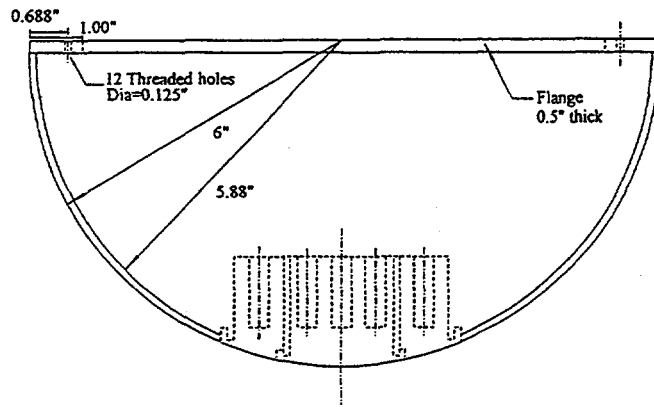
Side View of the Thick Aluminum Test Section in the Bottom Center Region of the Vessel.
